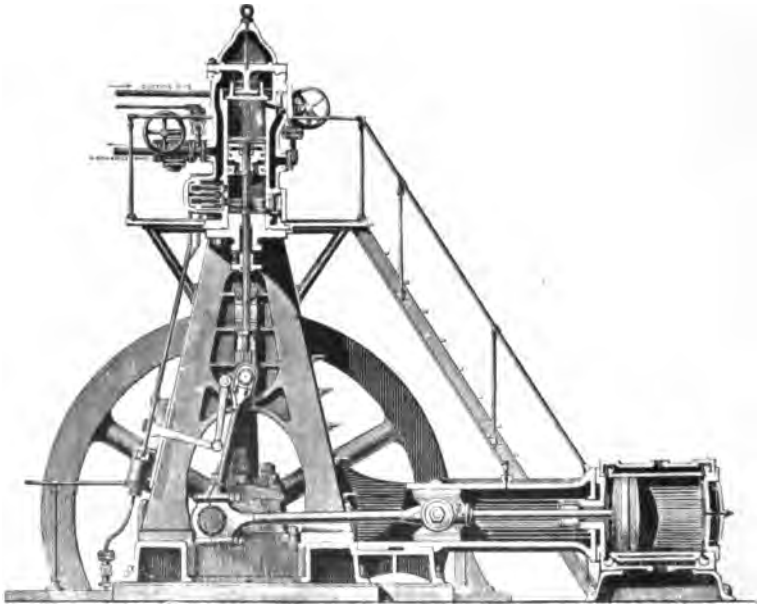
SECTION OF DE LA VERGNE ENGINE AND COMPRESSOR.
